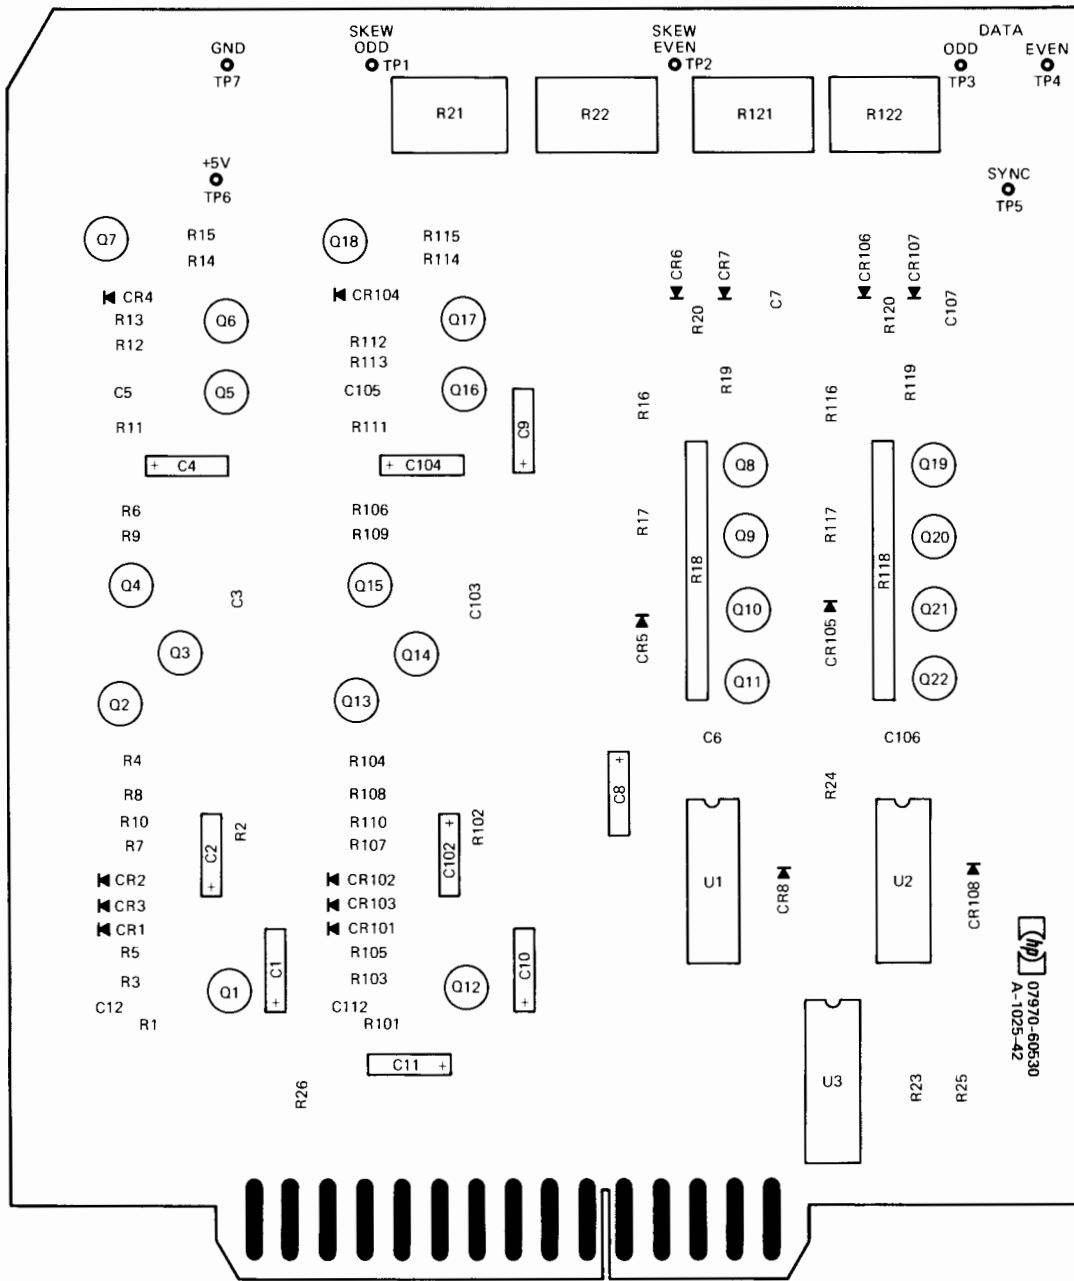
Dual-Channel Read Data PC Assembly (21 - 45 ips), Parts Location Diagram
